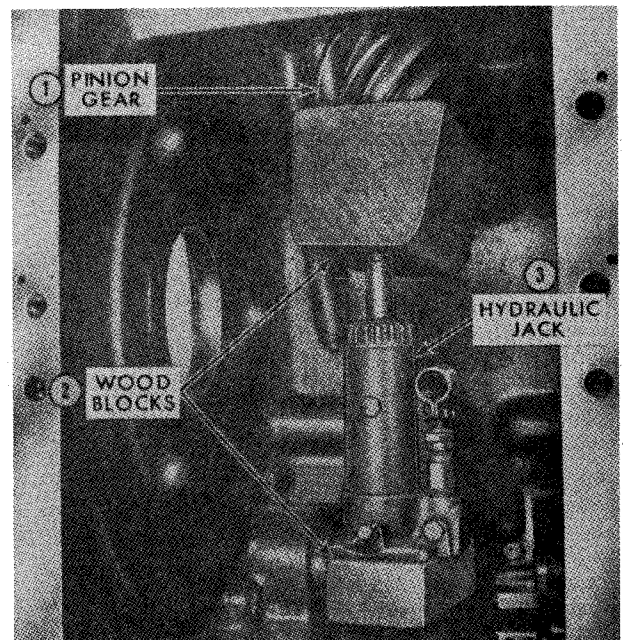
Hold bevel pinion with hydraulic jack and wood blocks as shown when installing front bearing cone (5—Fig. 173); refer to Fig. 176.
